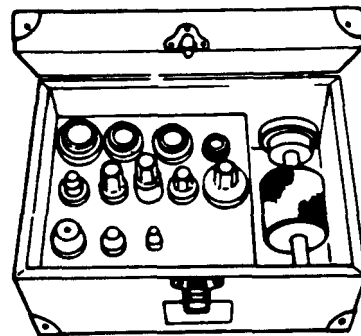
Compressor Assembly Fixture 6795966-100
